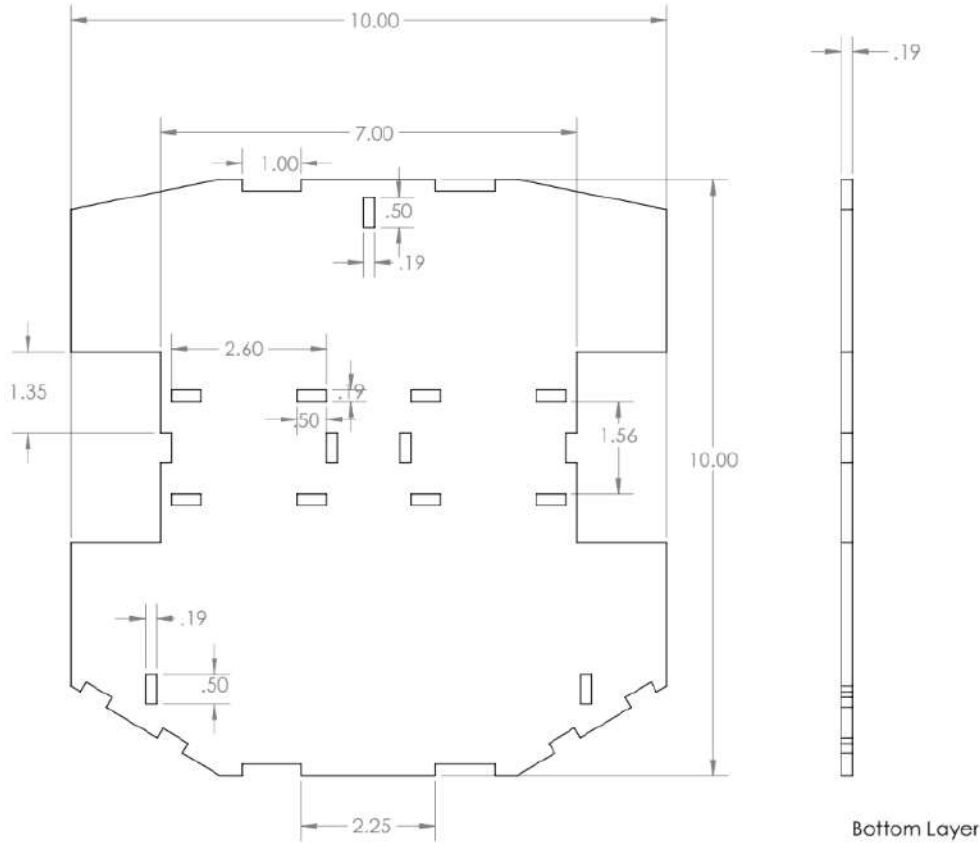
Bottom Layer: This bottom layer was informed by motor size dimensions for tab-and-slot construction, as well as wheel dimensions. We mounted tape-sensors into the slots at the front-right, front-left, and back center.
